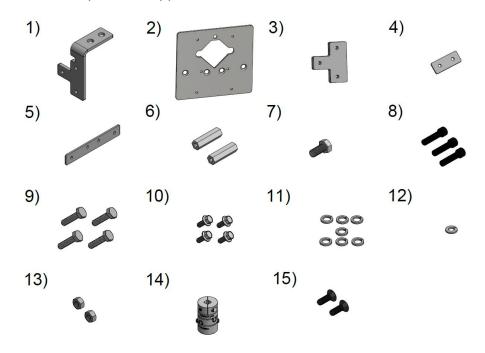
Pieces Supplied with a BR-LE-GAS-0.375SQ Bracket Kit
